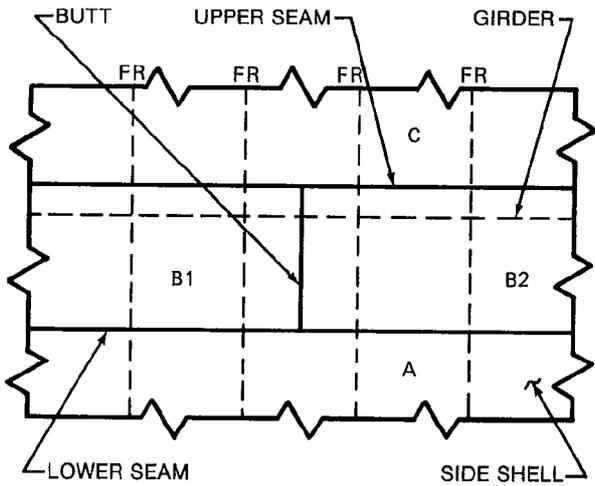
Typical Welding Sequence For Plate Butts and Seams Where Butts are Staggered
